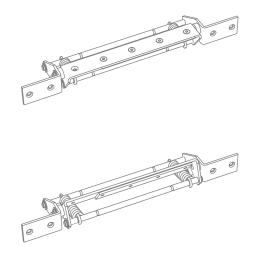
Drawing of the ERC in closed and opened configuration.
